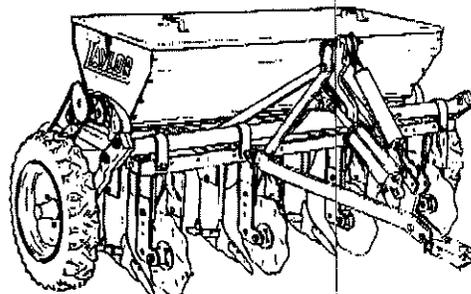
To install seal, bolt seal to bracket using 3/8" x 2-1/2" plow bolt furnished with machine.
